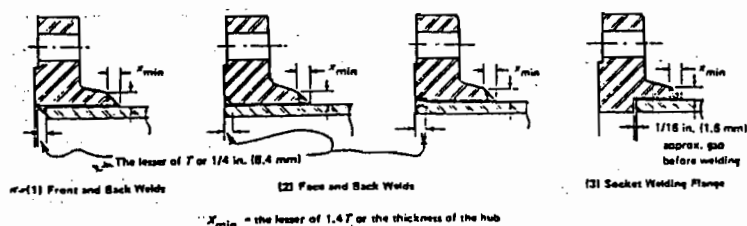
B TYPICAL DETAILS FOR DOUBLE-WELDED SLIP-ON AND SOCKET WELDING FLANGE ATTACHMENT WELDS
